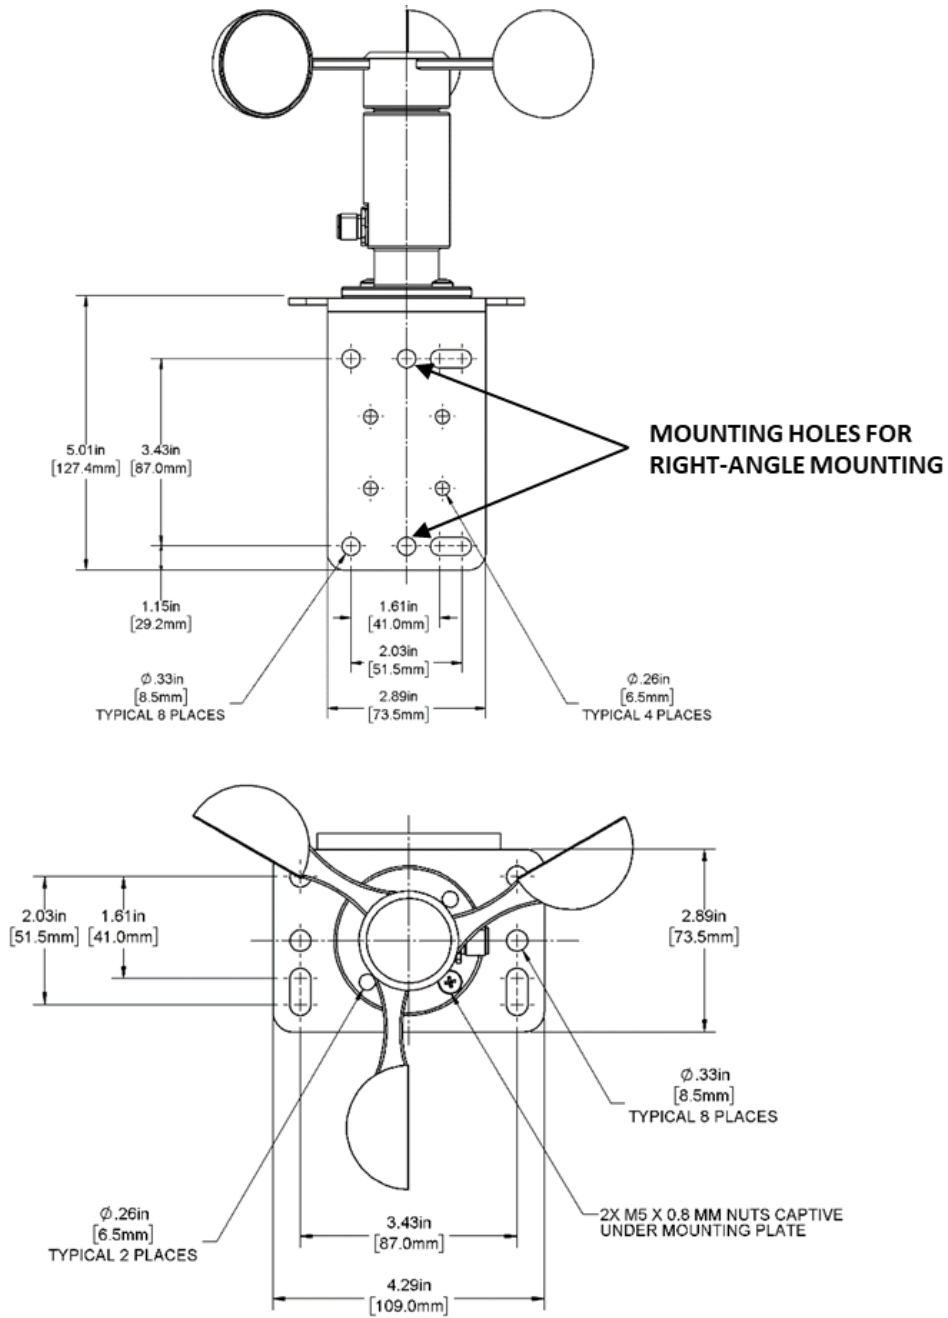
610635 Wind Sensor mounting plate dimensions
